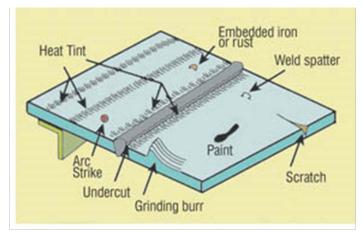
Common types of surface defects arising during steel fabrication.¹
